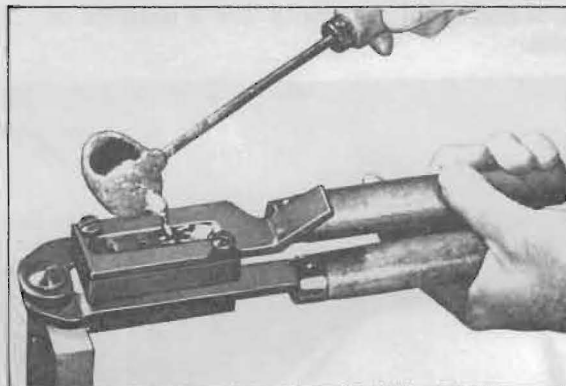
When pouring the lead alloy, the mold must be supported at the front — usually by a wood block or frame. The molten metal enters the cavities through the sprue holes.
